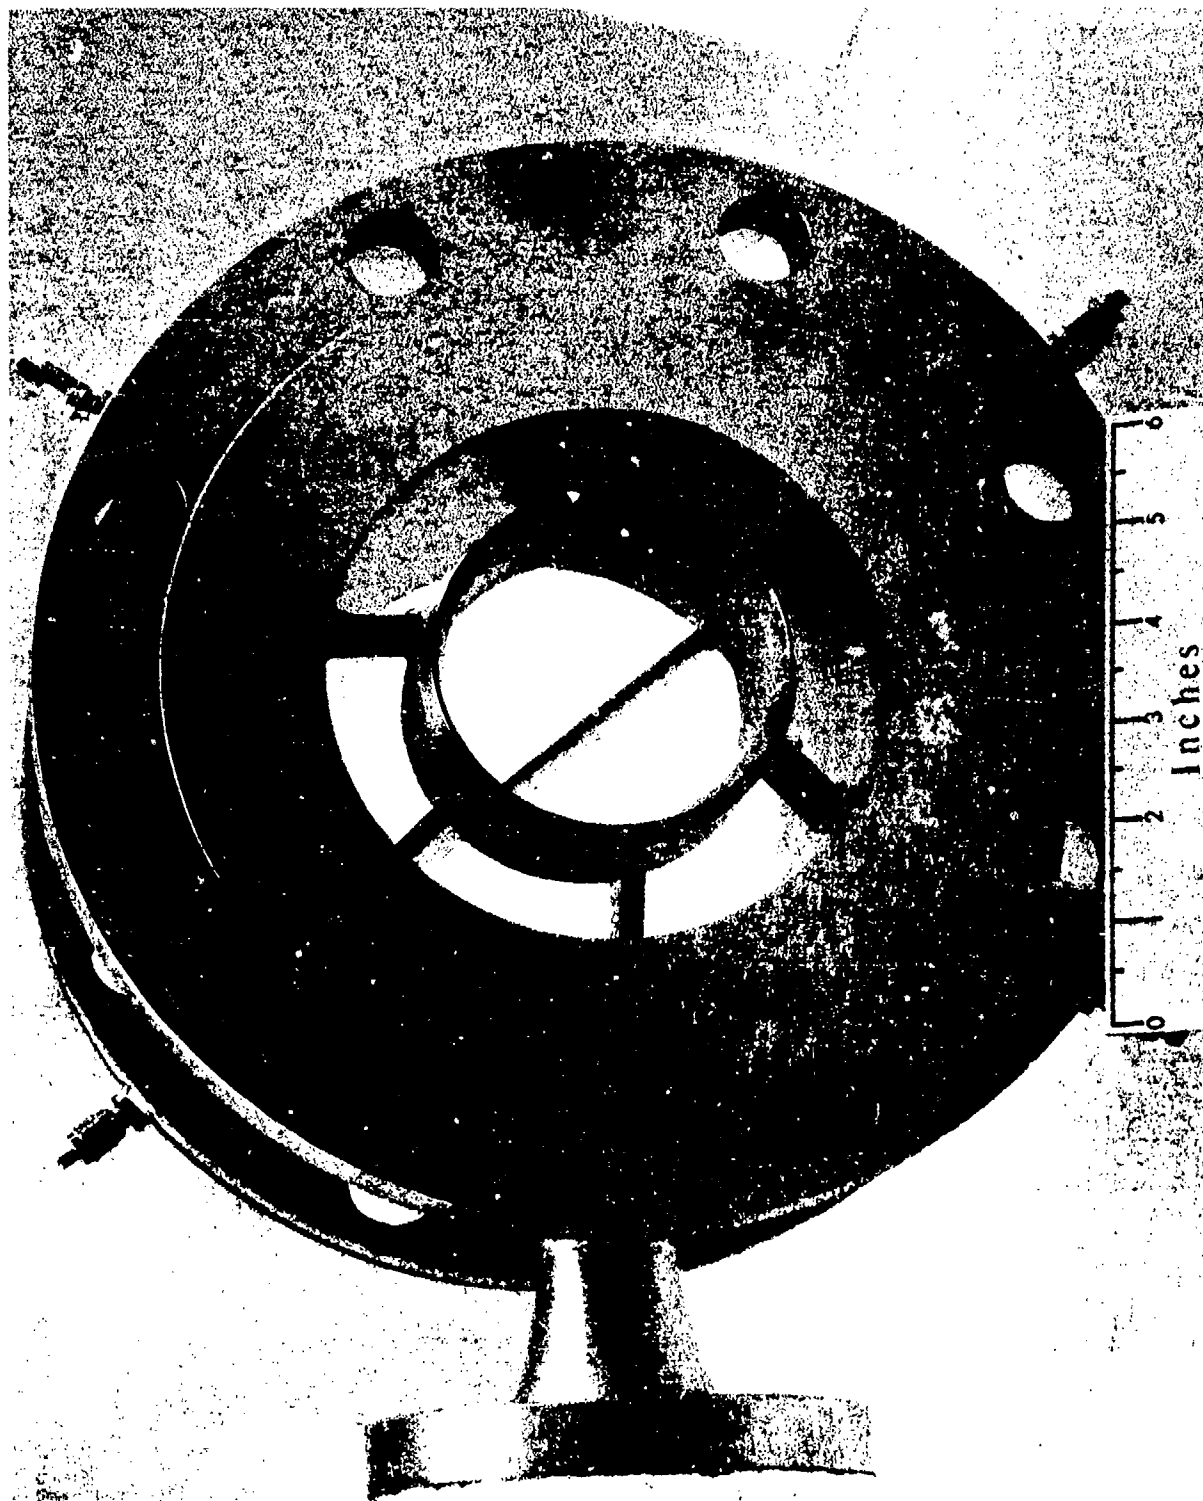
Hypermixing Ejector Nozzle Test Item Assembly, 3/4 Rear View
